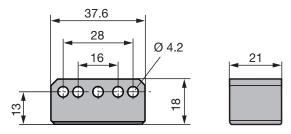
Installation dimensions of BTL6-A-3801-2 magnet
